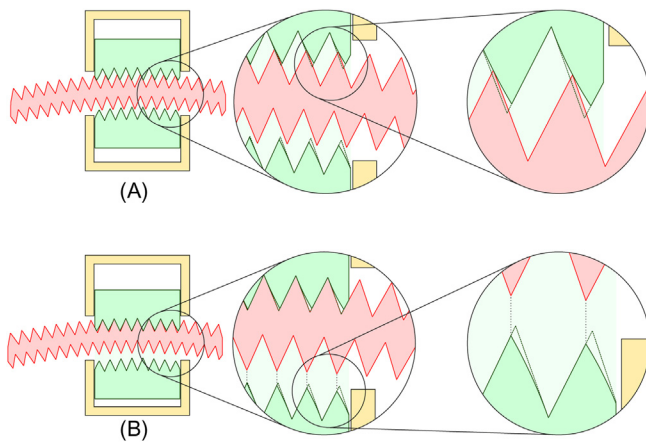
Analysis of teeth shape in curved stepper motor. The piston teeth have a special shape in order to optimize contact and reduce risk of jamming.
